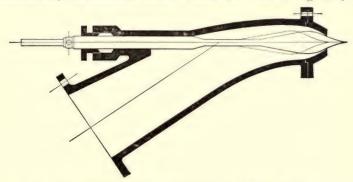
Sectional View of Pelton-Doble Needle Nozzle.
